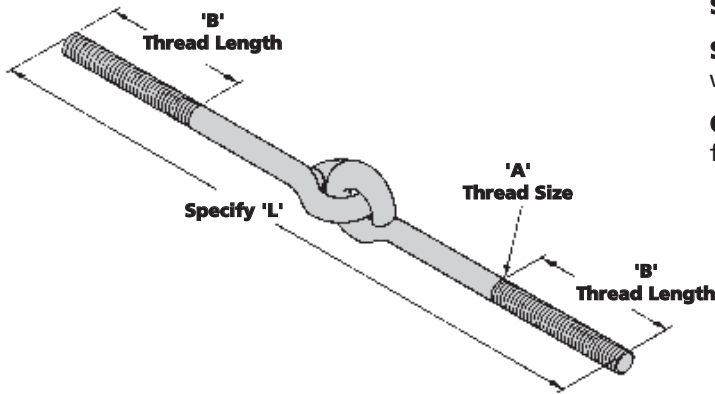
X Linked Eye Rods (Right-hand threads-both ends)
